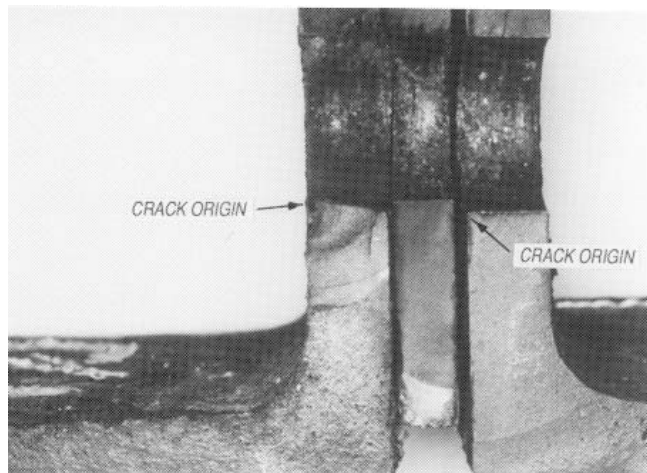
Crack surface at the edge of rivet hole
